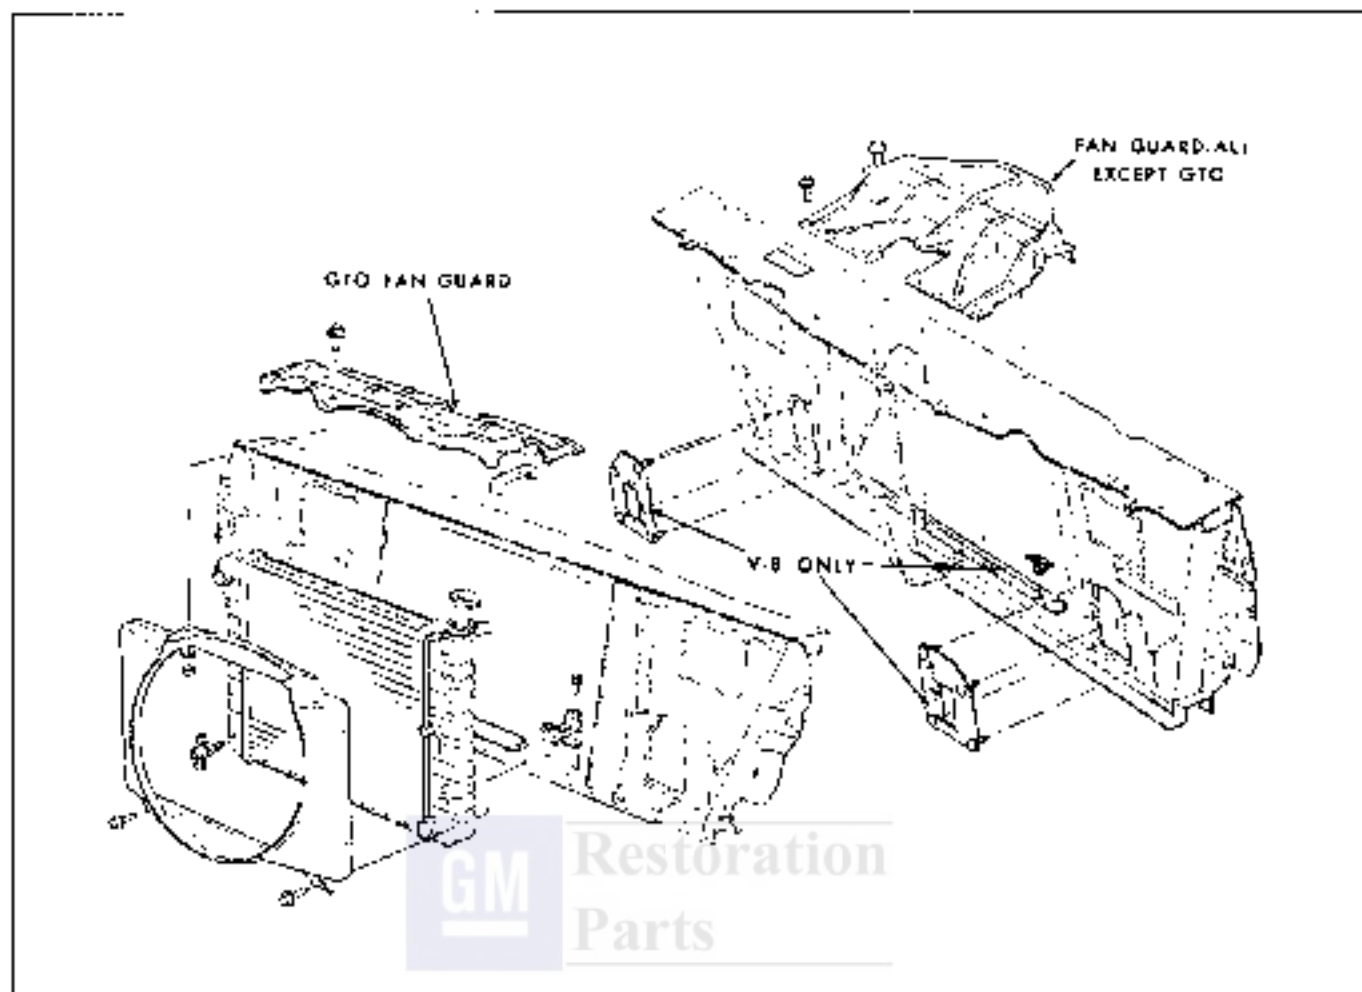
A-2 Radiator Support and Saffle Assembly - Tempest
